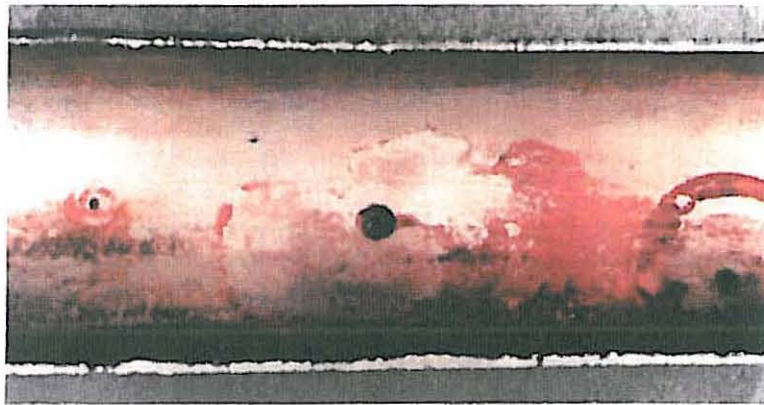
Pitting corrosion failure of an austenitic stainless steel condenser tube, due to MIC.
